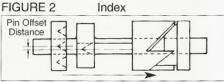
shows piston location after air valve has allowed air in. 95% of index is complete. Pin center line slightly offset from hole center line.
